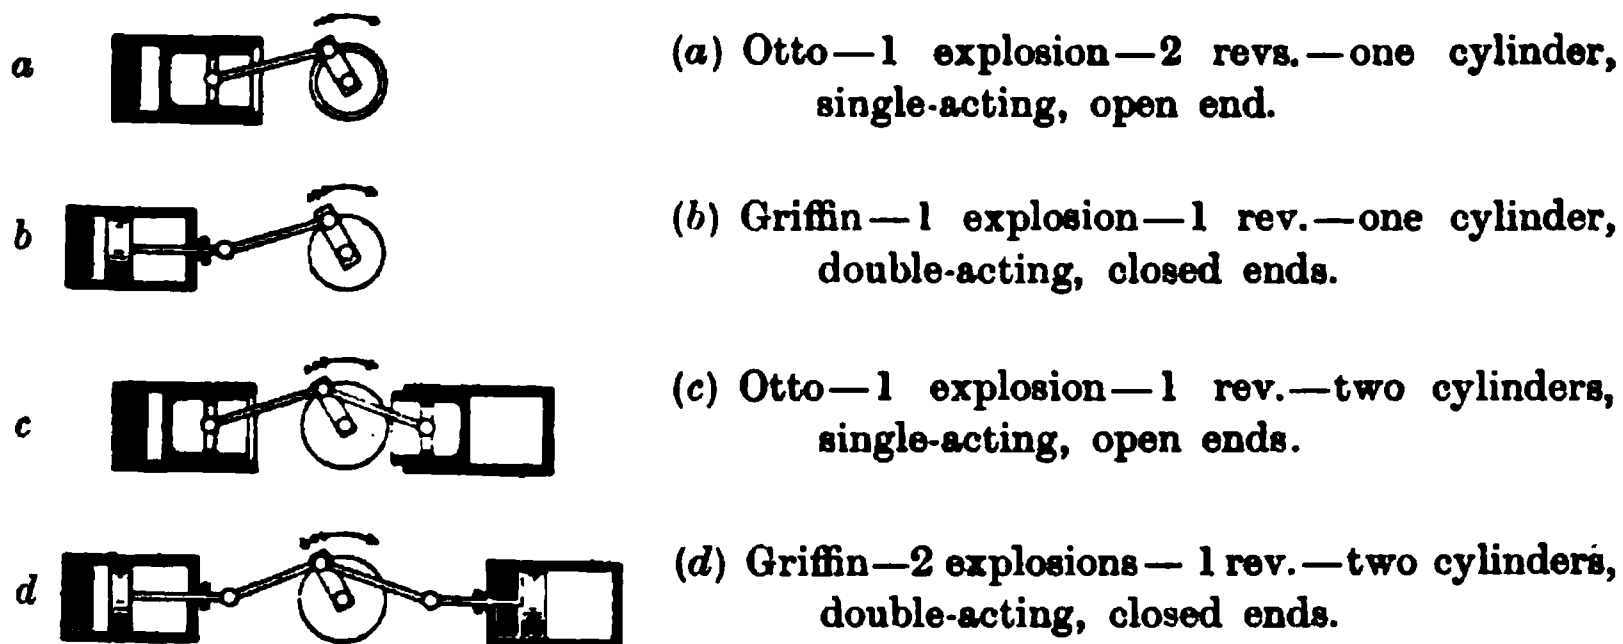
Diagram of Single- and Double-Cylinder Explosion Engines.
